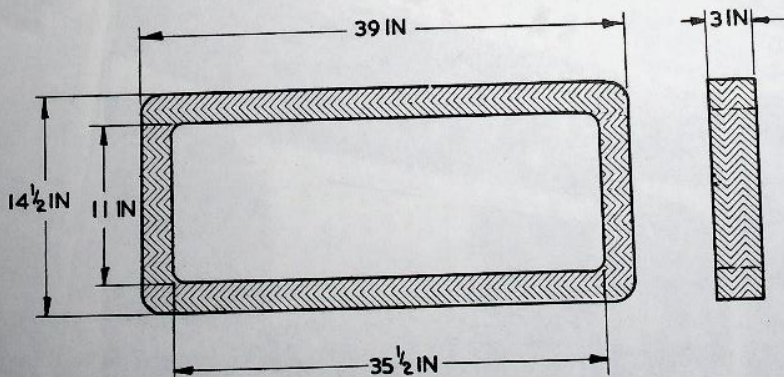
(iii) Shape of vacuum vessel insulators.
